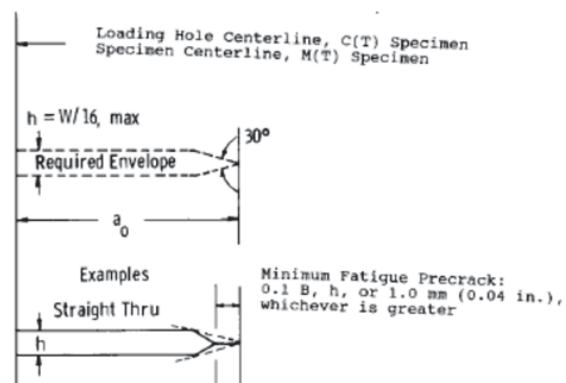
Notch details and Requirement of Minimum Fatigue Precracking [2]
